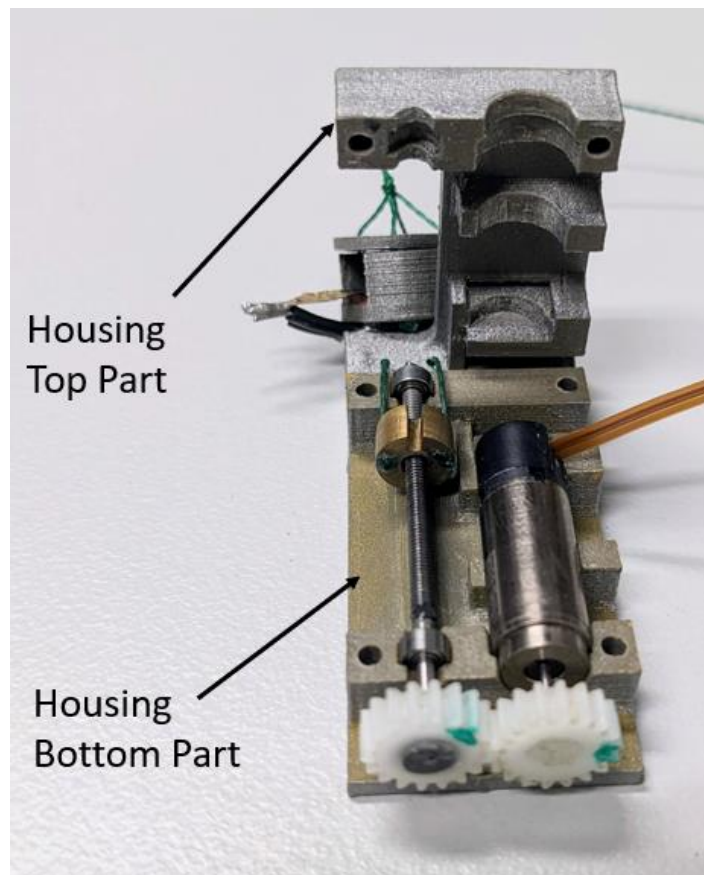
New master system with semi-opened housing revealing parts inside (front view).
